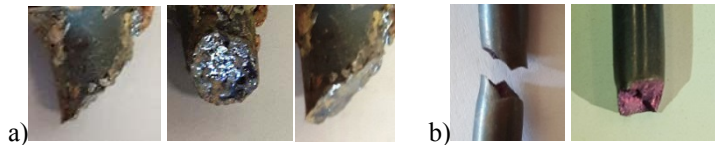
Fracture surfaces immediately after rupture: a) specimen tested at 575MPa in lead; b) specimen tested at 560MPa in air.
